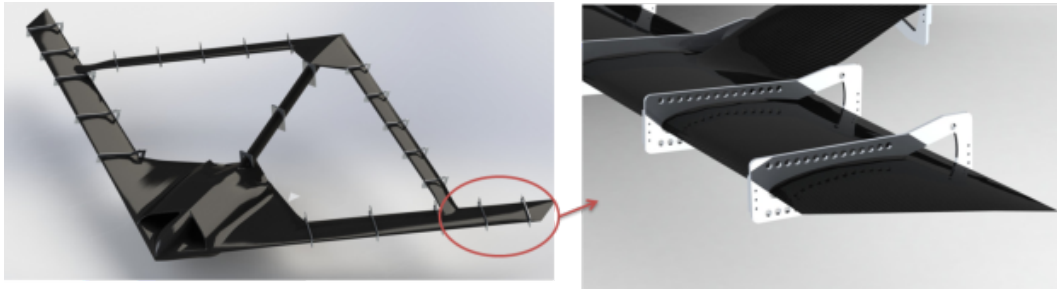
Outer rib casings distributed across platform (left); Zoomed in view at wing tip (right)
